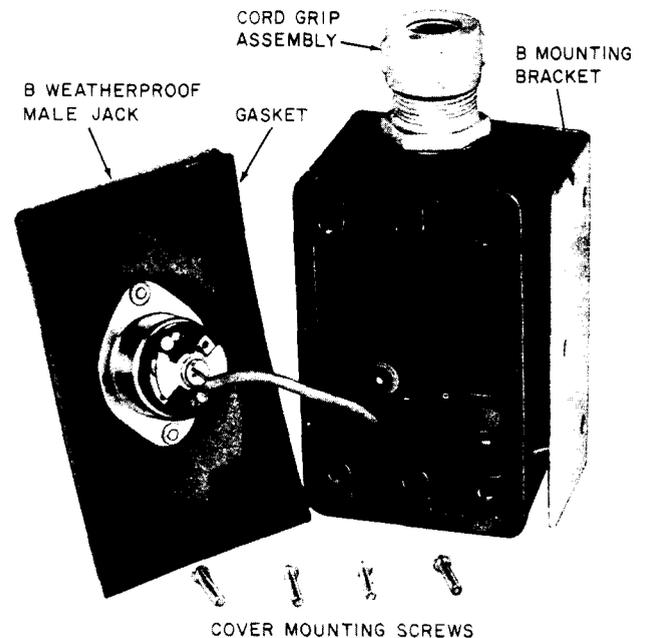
B Weatherproof Male Jack on B Outlet Box Showing Ground Lead Connected to B Mounting Bracket
